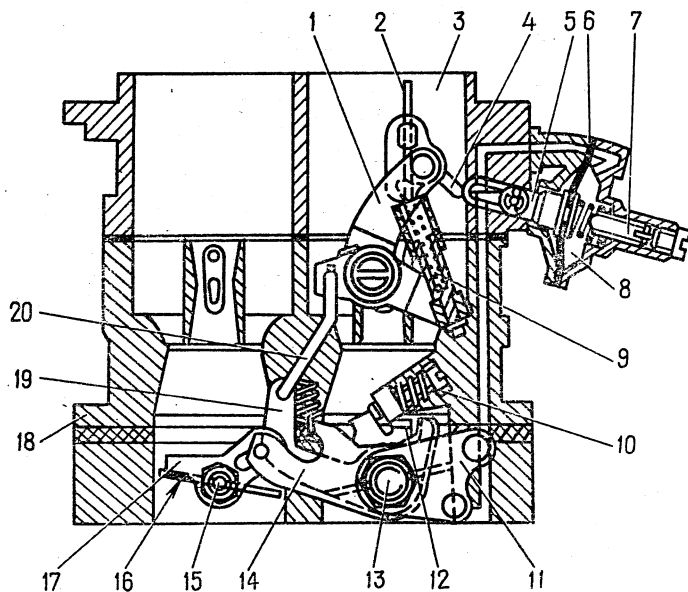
Choke Mechanism of Carburetors 2106-1107010, Diagrammatic:
